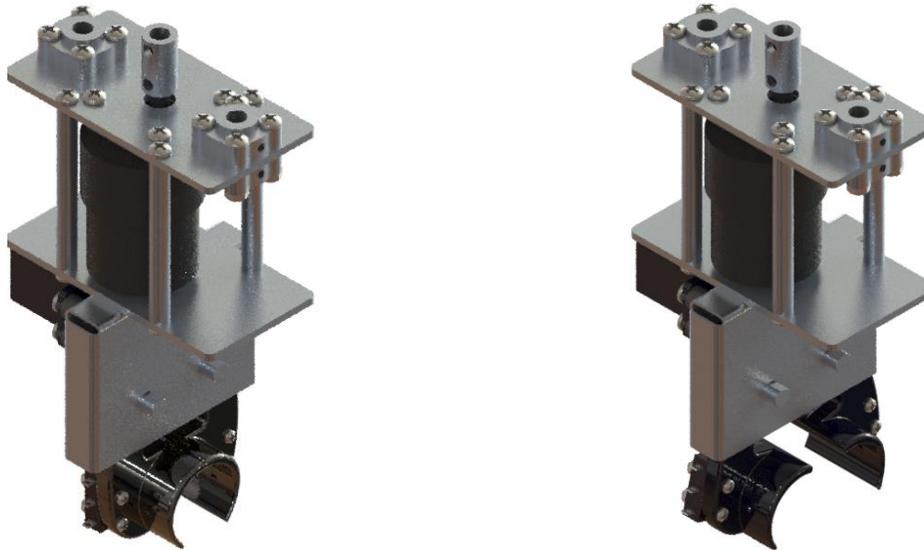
Gripper assembly with closed (left) and open (right) payload arms.
